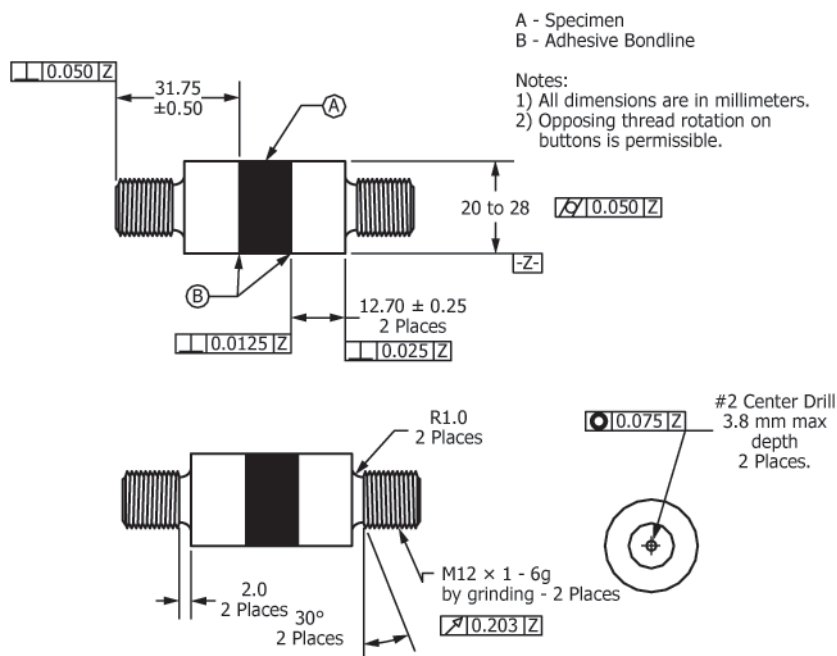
Drawing of End Tabs and Cylindrical Specimen Assembly (SI units)
